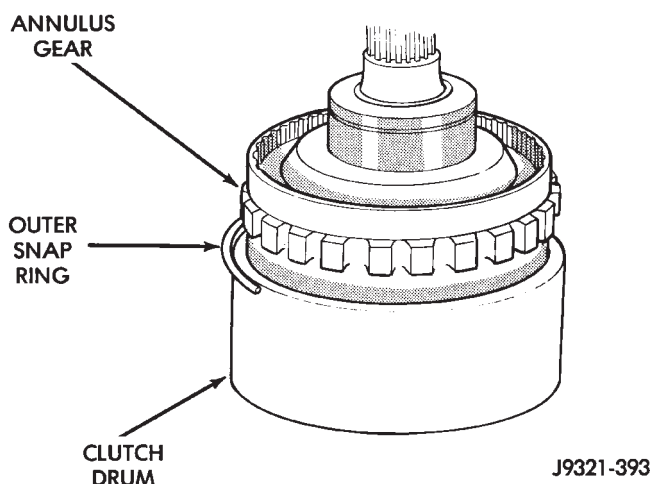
Installing Clutch Drum And Outer Retaining Ring
